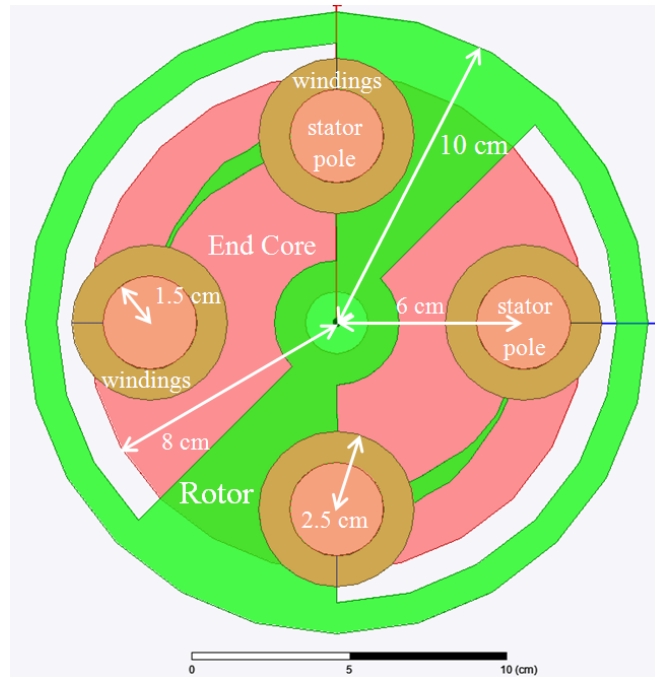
Machine dimensions, end view (nearest end core not shown)
